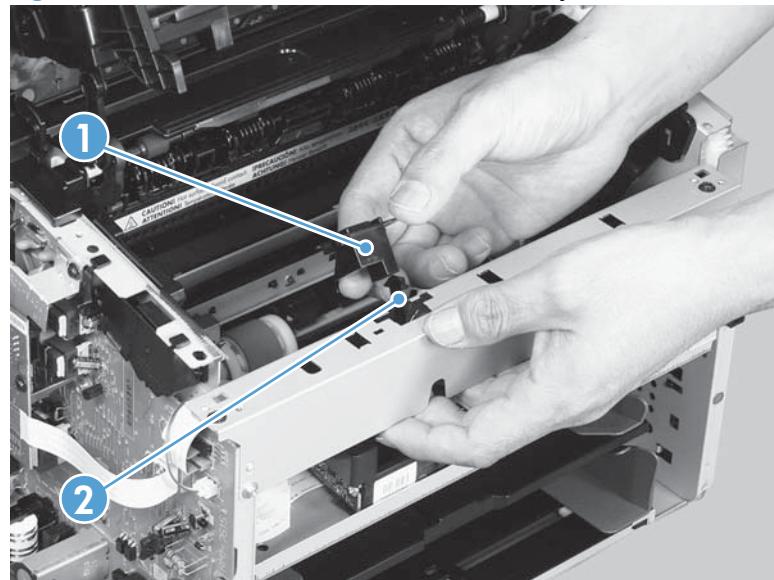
Remove the laser/scanner assembly (5 of 5)
